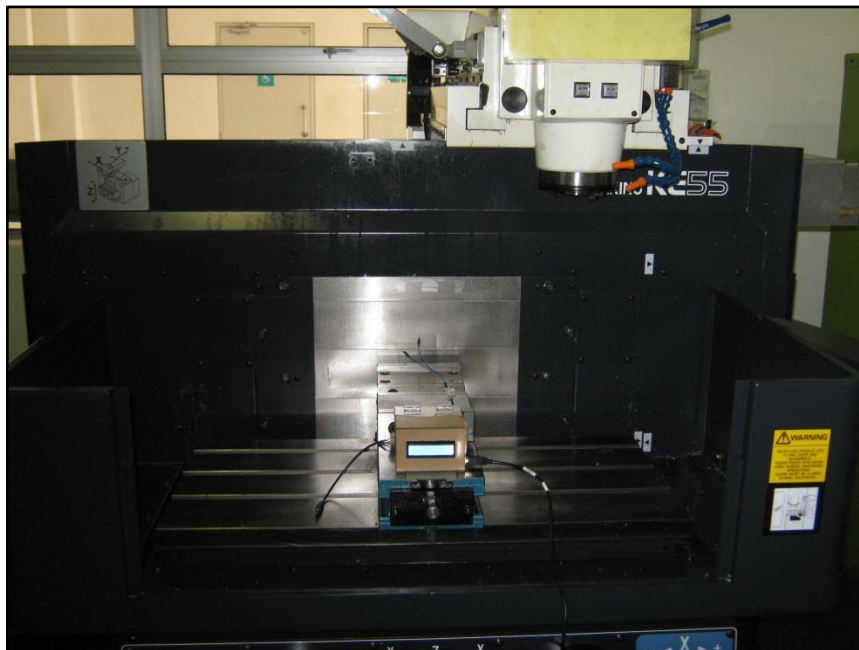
Device is being run on platform (Milling Machine) for z-axis direction at minimum height.
